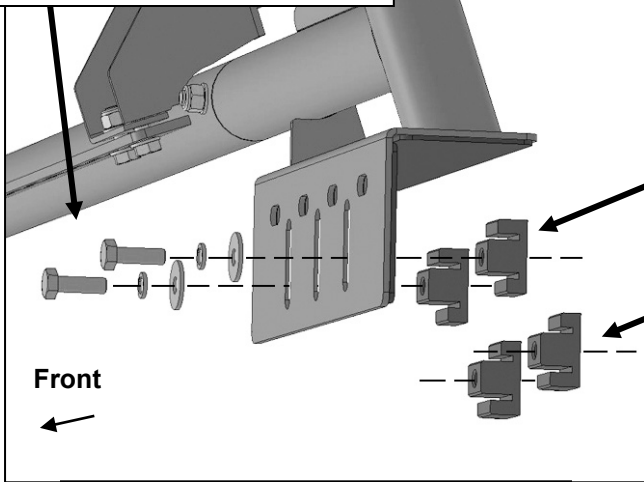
Measure inside width at top of bed (bottom arrow). Adjust width of Rack assembly to match truck bed
